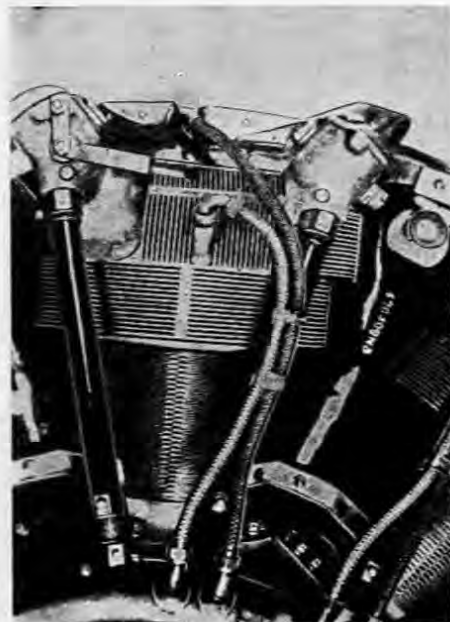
Cylinder of the Wright aircraft engine with forged cylinder head, machined fins on the head and aluminium sheet fins on the cylinder.
